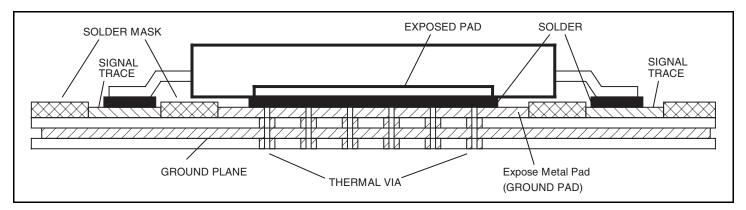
P.C. Board for Exposed Pad Thermal Release Path Example
